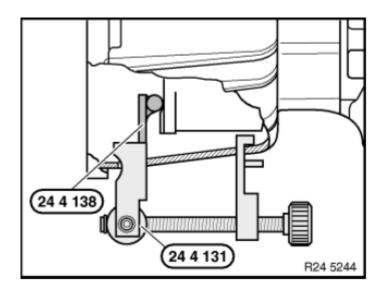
Inserting Special Tools 24 4 131 And 24 4 138 Into Recess On Transmission Housing Courtesy of BMW OF NORTH AMERICA, INC.
